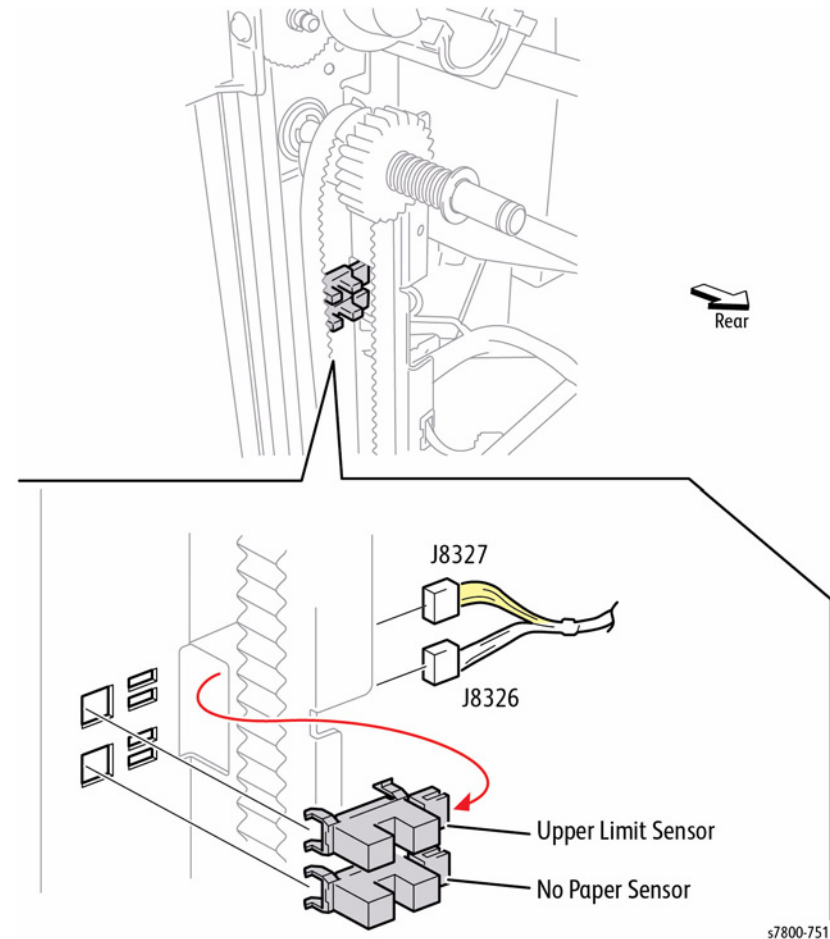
Removing the Lower Tray Upper Limit and No Paper Sensors
